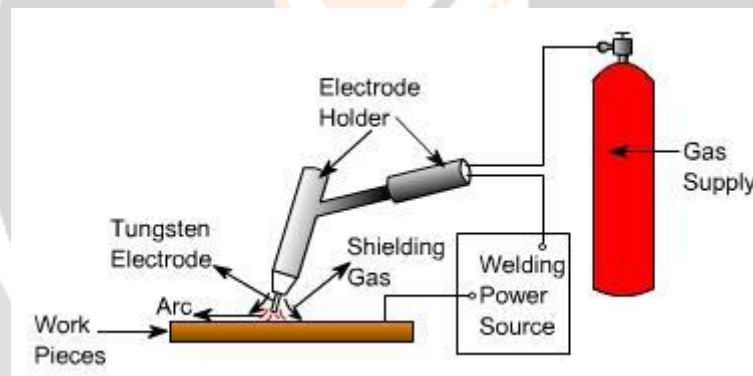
Schematic diagram of TIG welding process [2]
